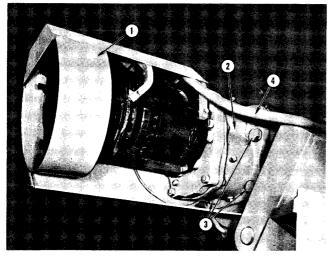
MOTOR, GEAR BOX AND COVER
